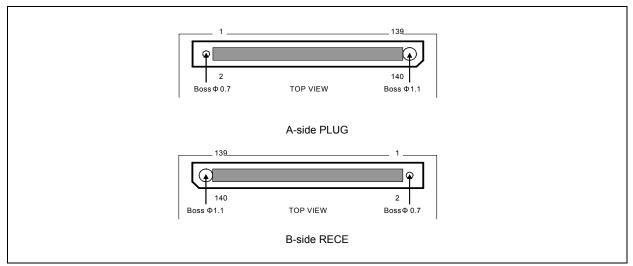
Mounted Direction of the Extension Bus Connector
